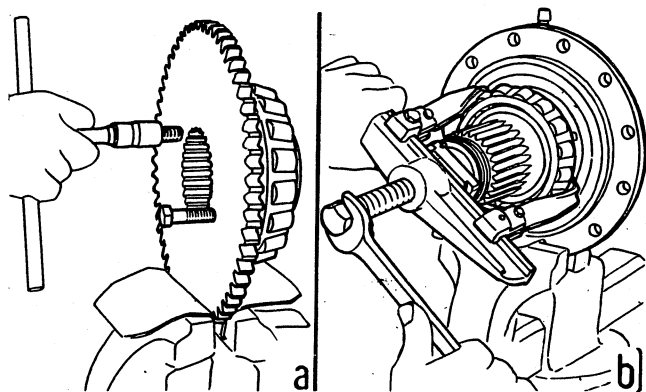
Removing the bearings from gear (a) using two puller screws (M8x1.25) and the spindle shaft (b) with universal puller.
